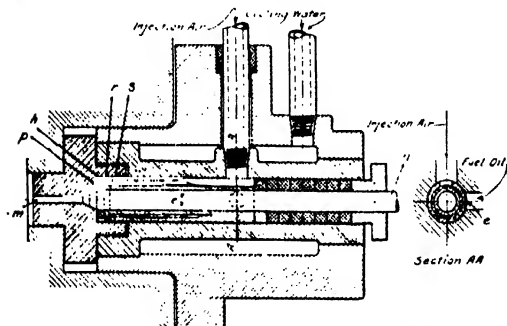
Section of Atomizer of Busch-Sulzer Brothers Diesel Engine
